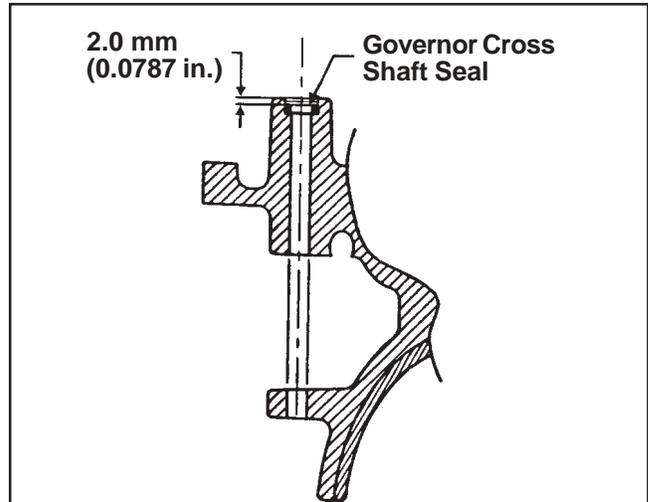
Governor Cross Shaft Oil Seal Position.
